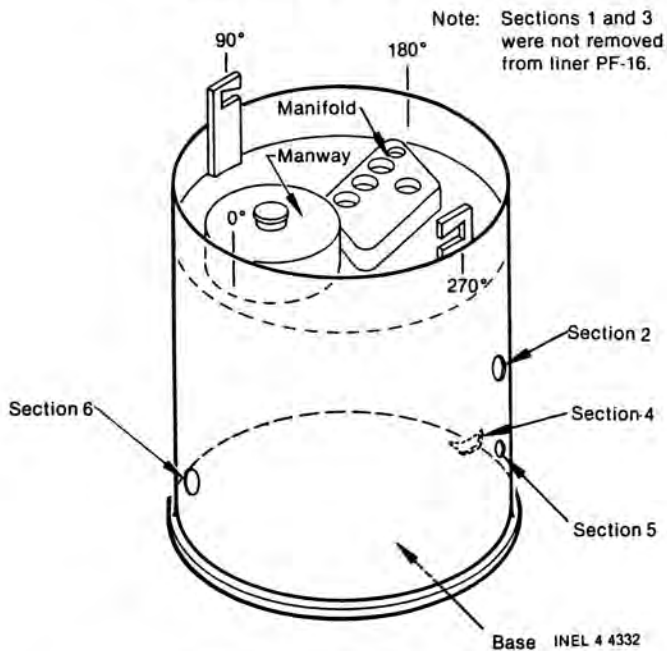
View of liner PF-16 showing locations where metal sections were removed.
